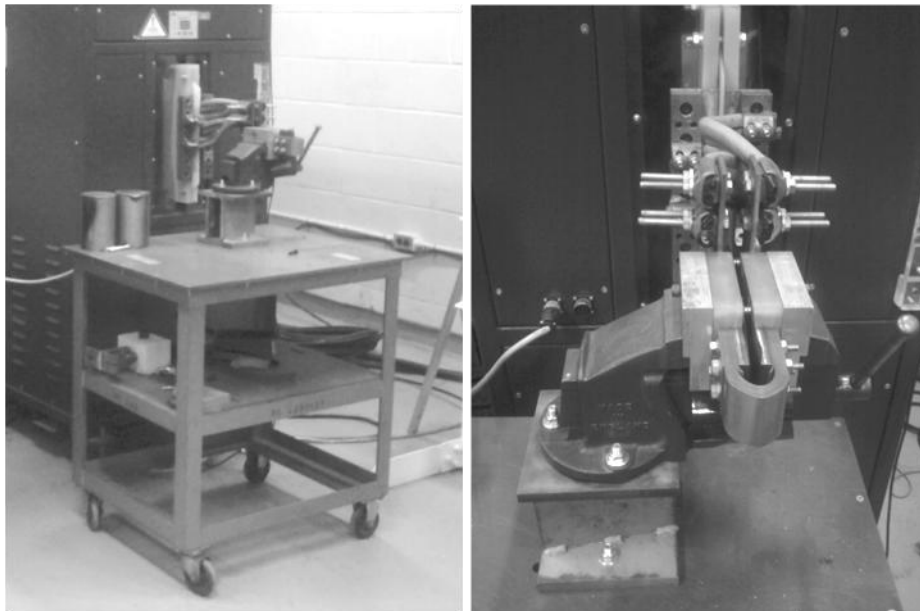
Photo of the operating double-sided coil welding setup.
